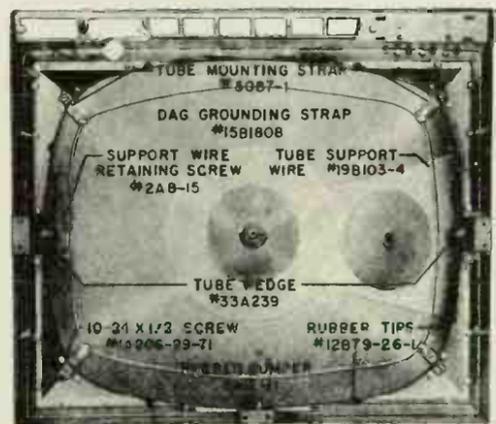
Rear View of Escutcheon and Picture Tube Mounting in Later Sets With Picture Tube Dag Grounded to Chassis.
